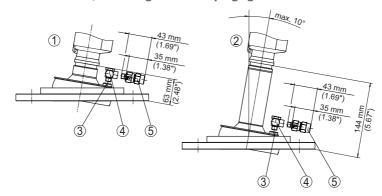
NivoRadar 3300, flange with lens antenna, swivelling holder and purging air connection
